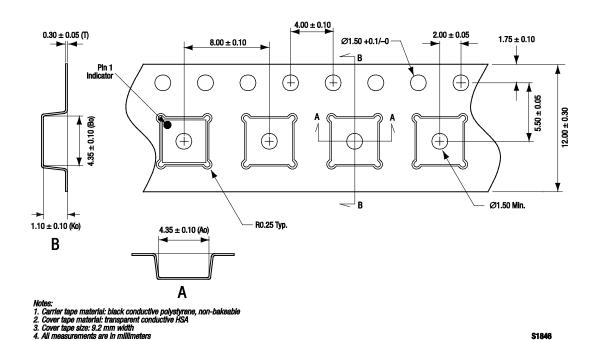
SKY73092-459LF51 Tape and Reel Dimensions
